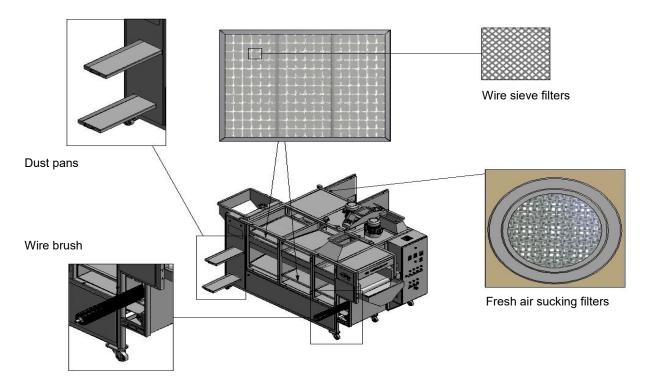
The parts of the oven, which should be cleaned daily after working process.
